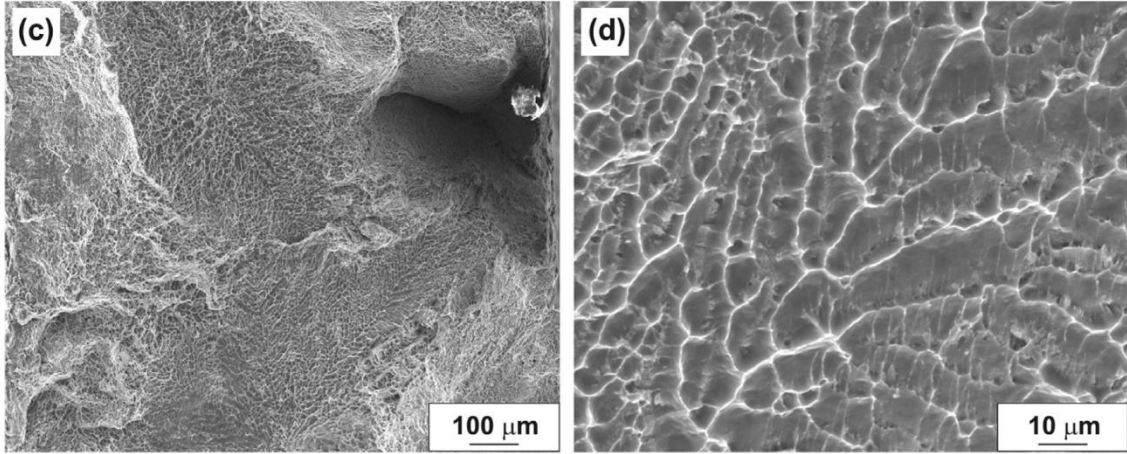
Fracture surface of casted Al-9Ce wt. % [46].
